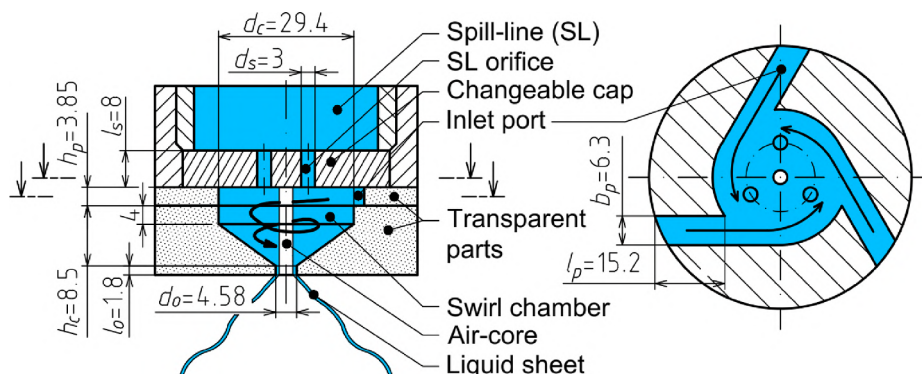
Atomizer schematic drawing with main dimensions in millimetres.
